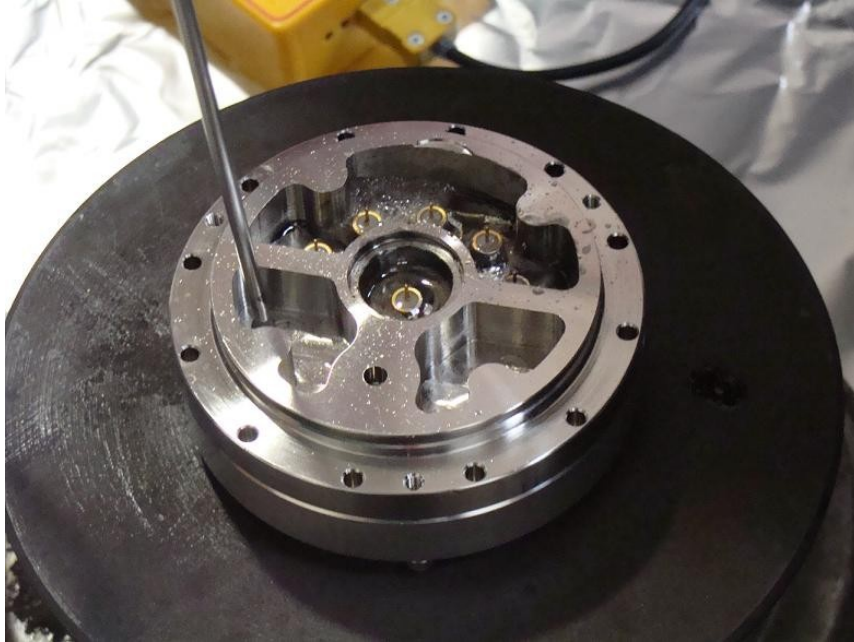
The six connectors soldered on the mounting plate. In the figure the electric heating plate and the thermometer are also showed.
